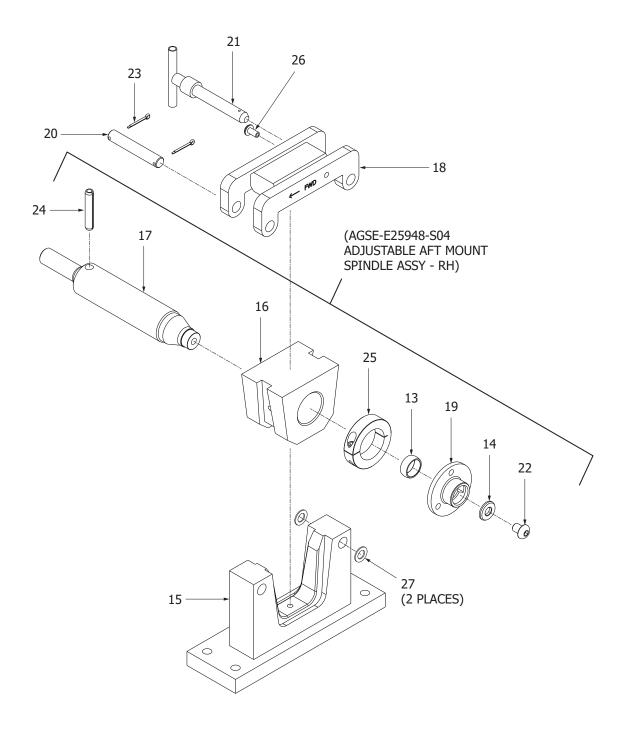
Adjustable AFT Mount Assembly - RH
